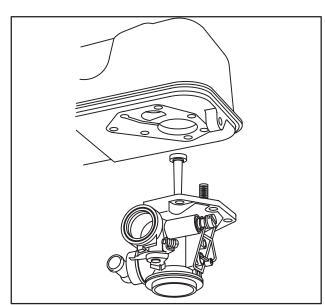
ASSEMBLING TANK TO CARBURETOR
